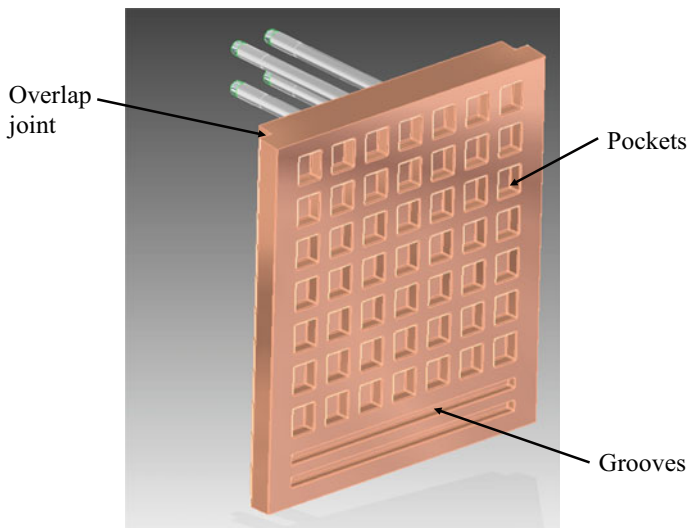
Copper casting with pockets, grooves, and ends for overlap joints
